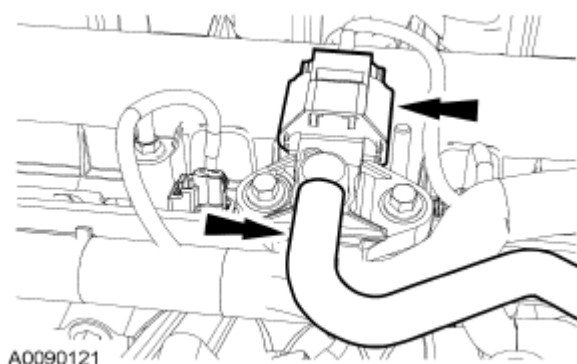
Locating Fuel Rail Pressure, Temperature Sensor Electrical Connector & Vacuum Tube
